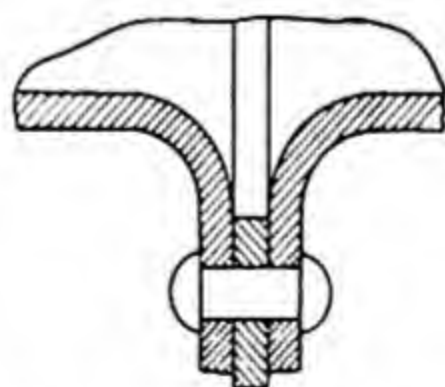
Adamson's flanged ring for permitting the furnace tubes to expand.
